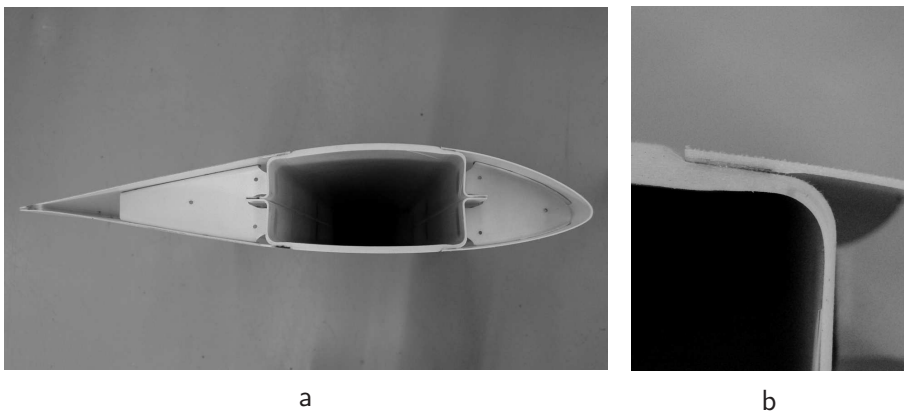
Finished blade (a) with zoom of the spar-box to nose panel weld (b).
